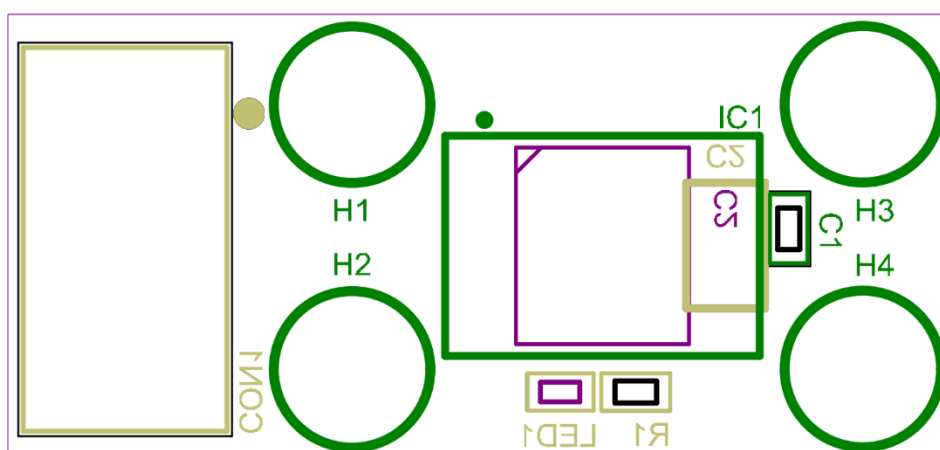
Magnetic Encoder PCB Assembly Diagram
